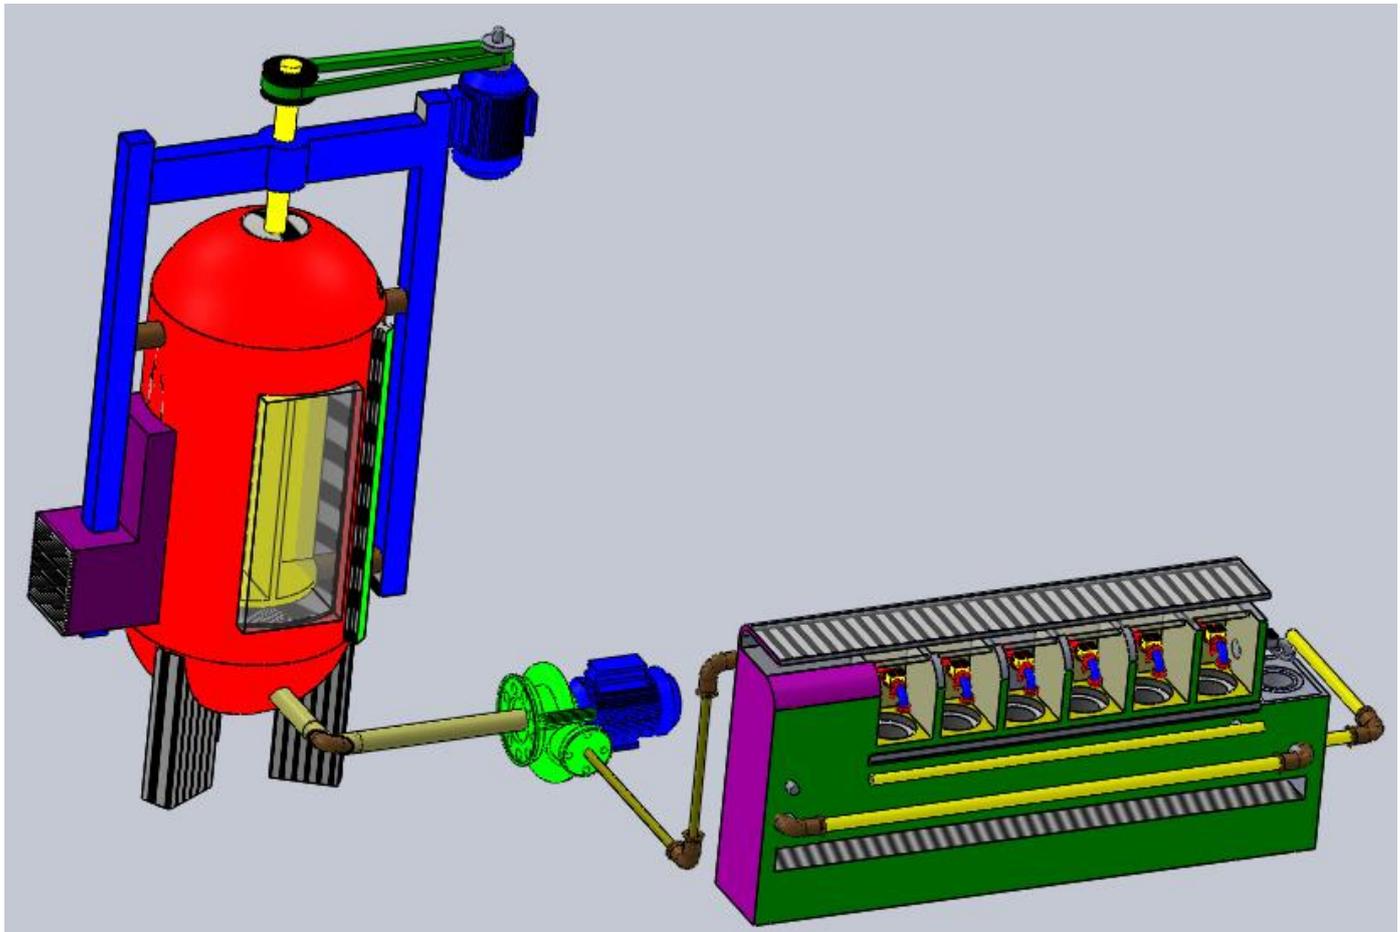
3D Solid work drawing of ‘‘Automatic operated Tea and coffee making machine’’.
